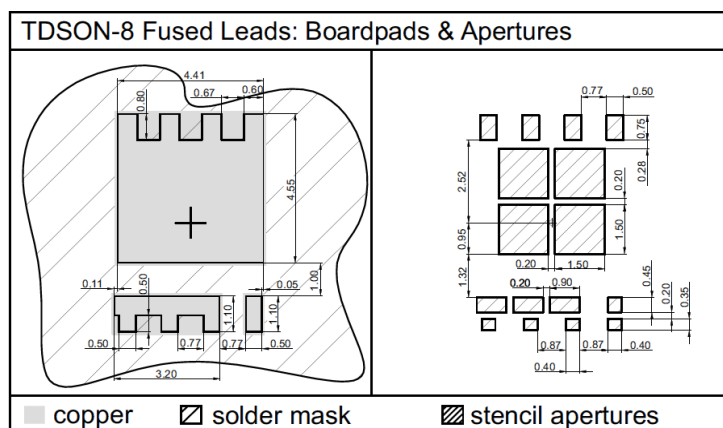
Footprint drawing PG-TDSO-8, dimensions in mm
